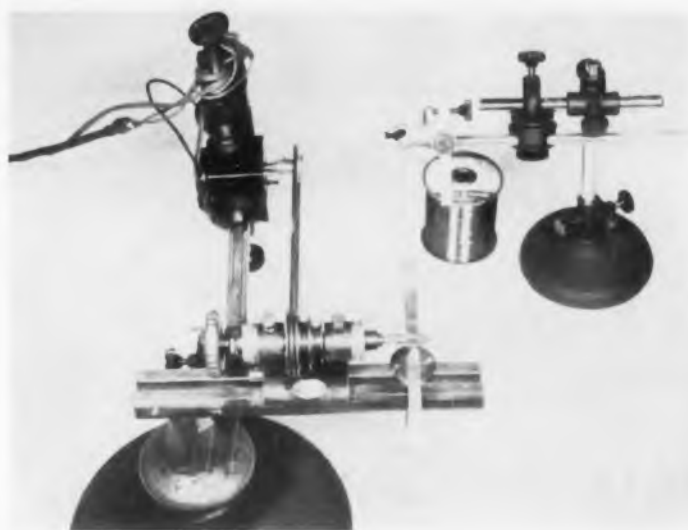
Machine for winding armature shown in Fig. 7. Adapted watchmaker's lathe is employed. Wire is almost invisible to the naked eye.
